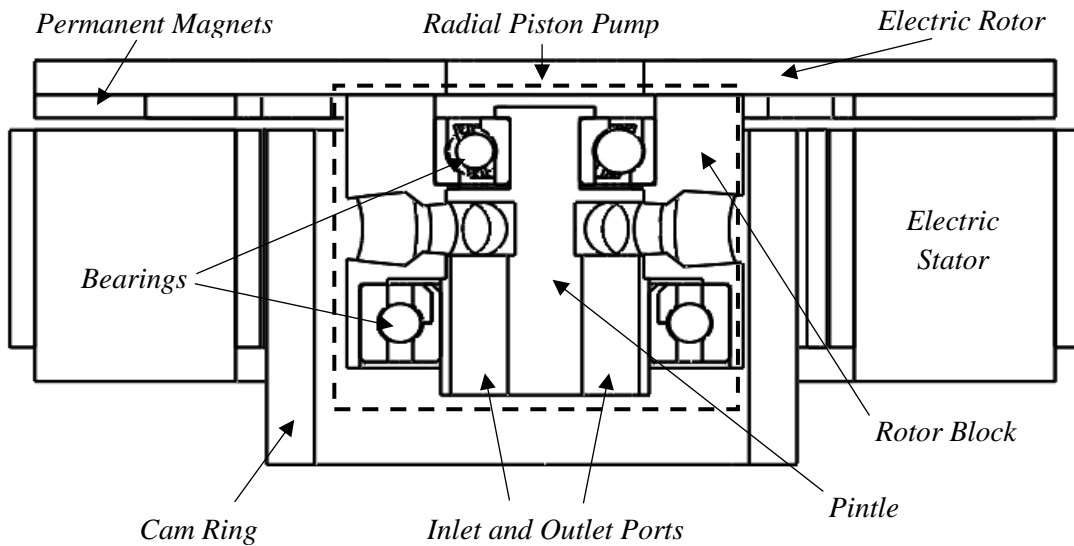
HECM CROSS SECTION SHOWING THE INTEGRATED ELECTRIC MOTOR AND HYDRAULIC PUMP²
